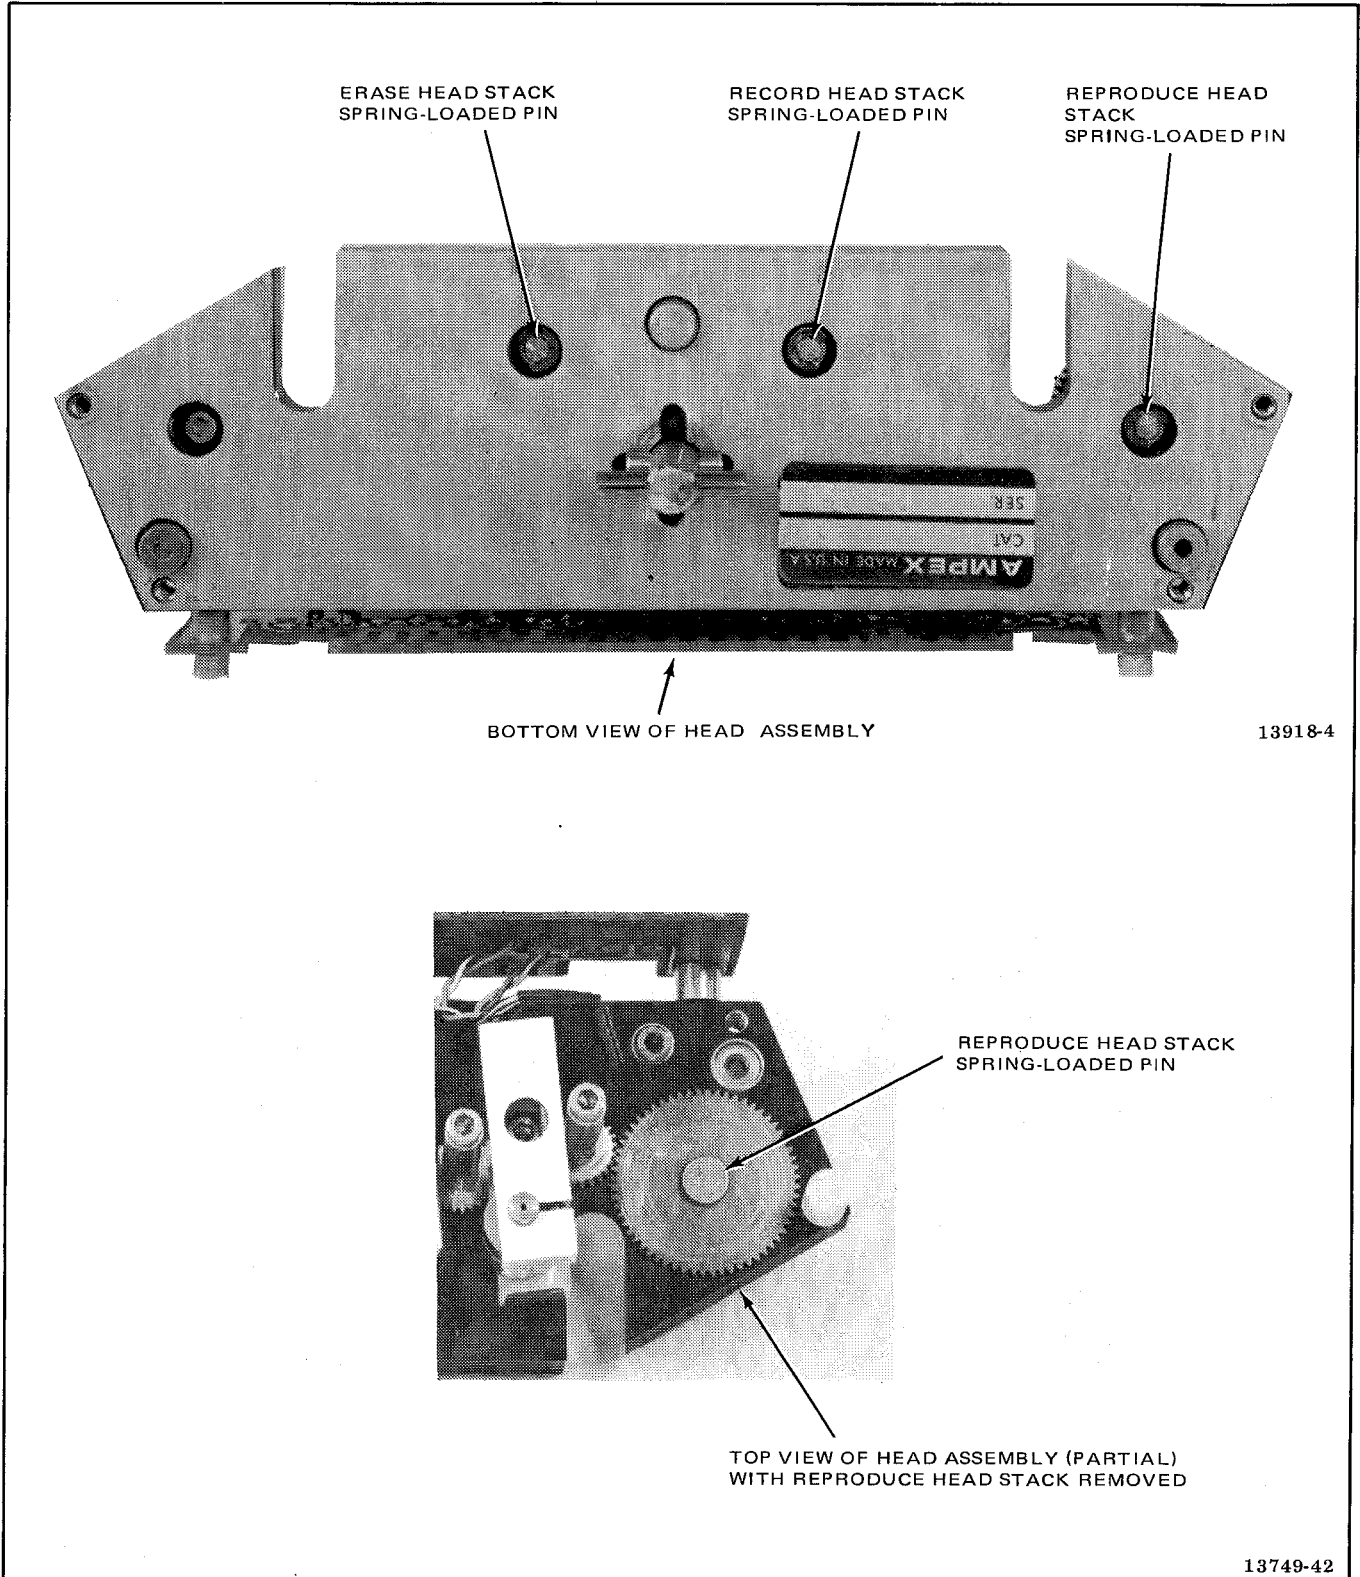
Head Assembly Spring Loaded Pin Locations, Main Head Shield Removed
